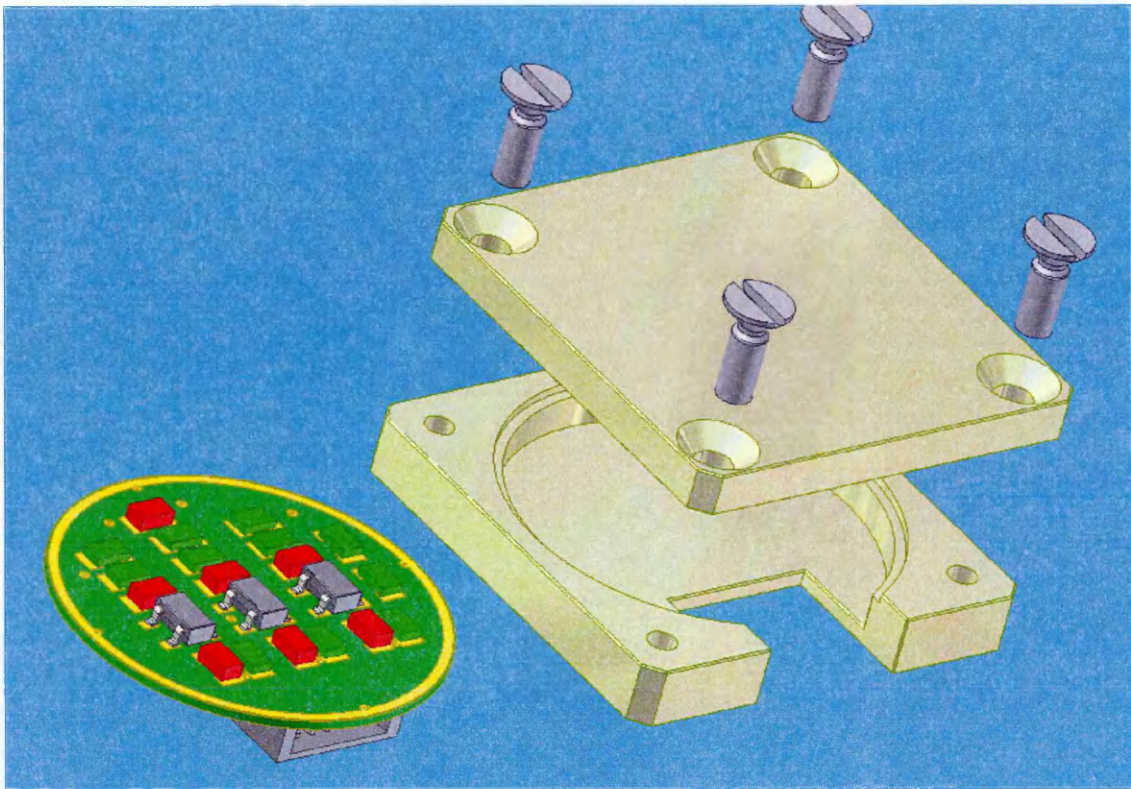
View of Prototype PCB (amplifier side) and Package
